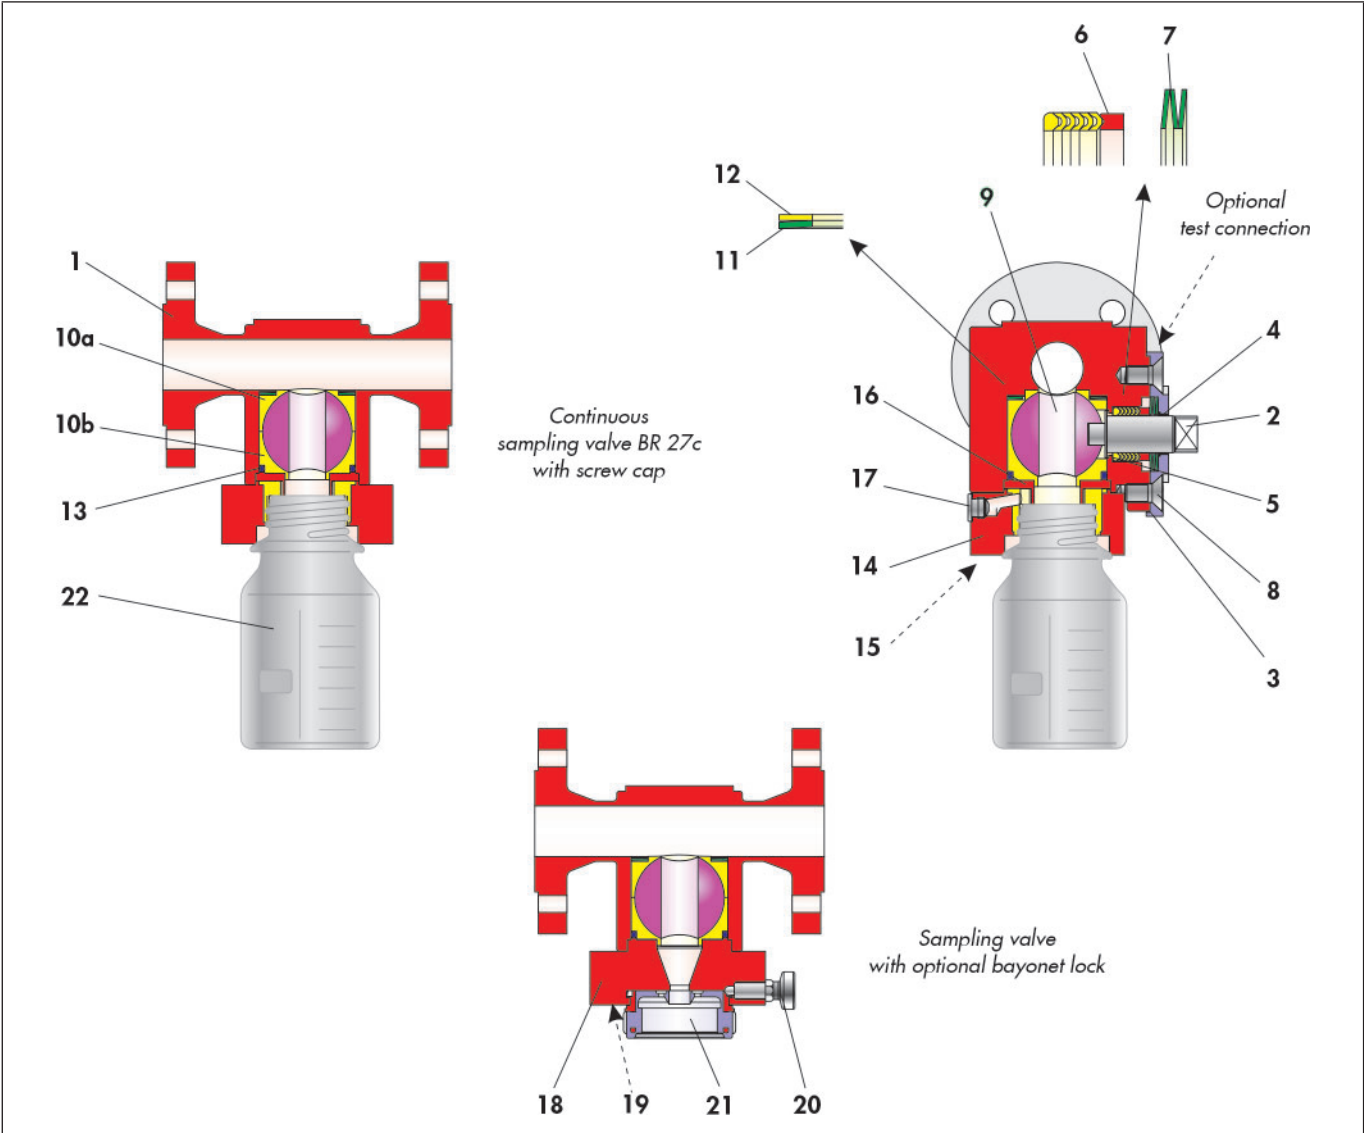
Sectional drawing of the BR 27c sampling valve
